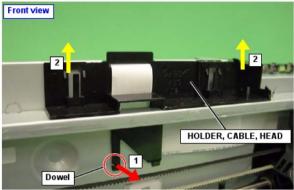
HOLDER, CABLE, HEAD Removal 1
